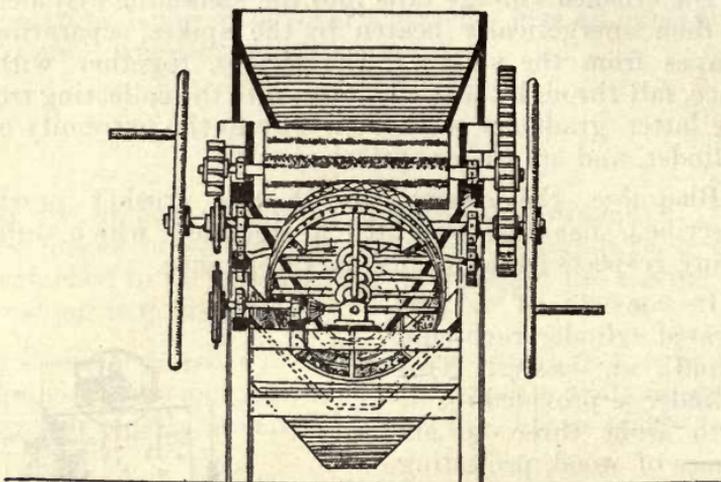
Blaquièrre's Combined Crusher, Drainer, and Stemmer (front view).
